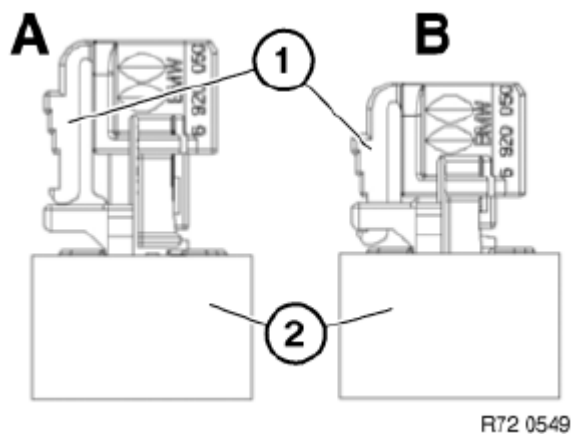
Identifying Initial And Final Engagement Position With Lock Button And Gas Generator
